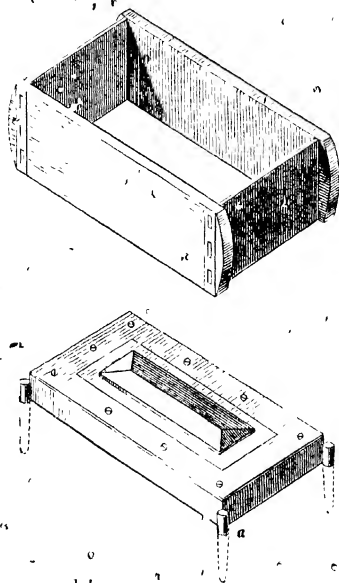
Isometrical view of brick mould, with its detached bottom or stock board.
